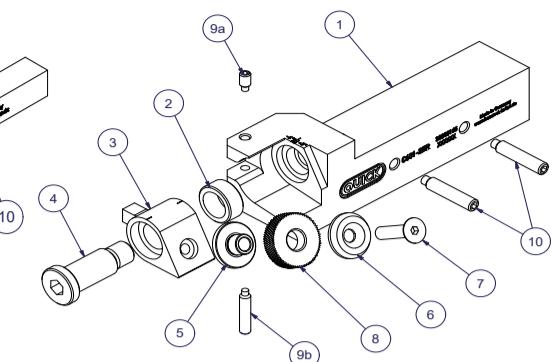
Series C601-25R exploded drawing (CNC-lathe)
